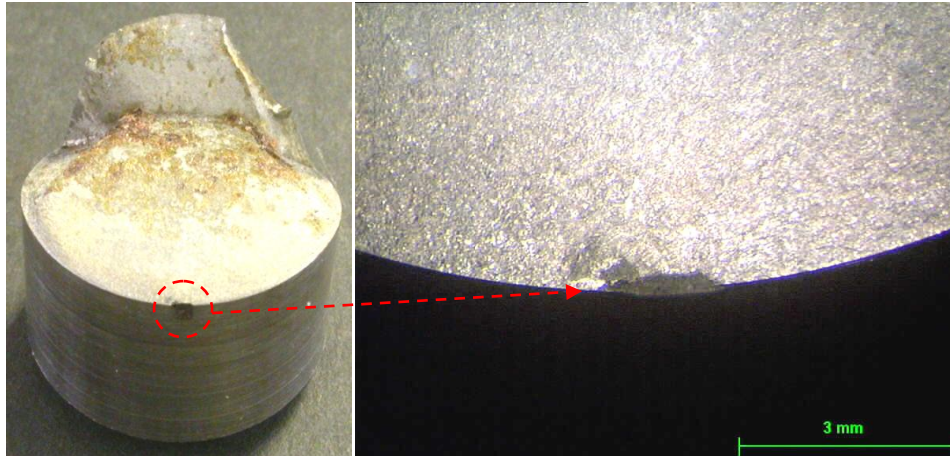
Large scale fatigue specimen 2 - Fracture surface and corrosion flow having caused the failure
